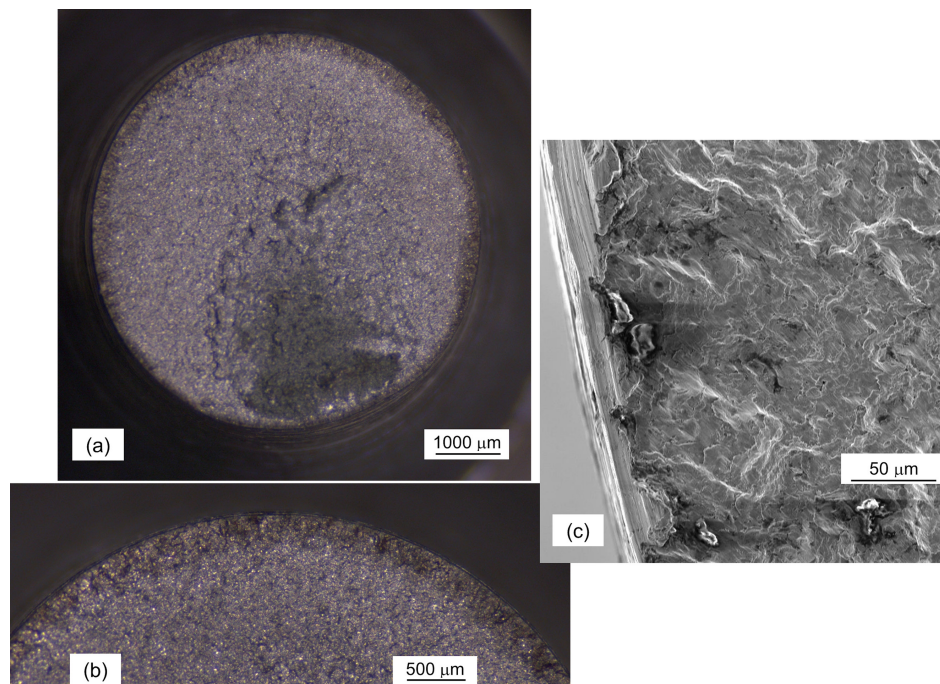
| (a) General view of the fracture of a sample that failed in the wrought material part. (b,c) Details of crack initiation from surface defects. [Colour figure can be viewed at wileyonlinelibrary.com]
